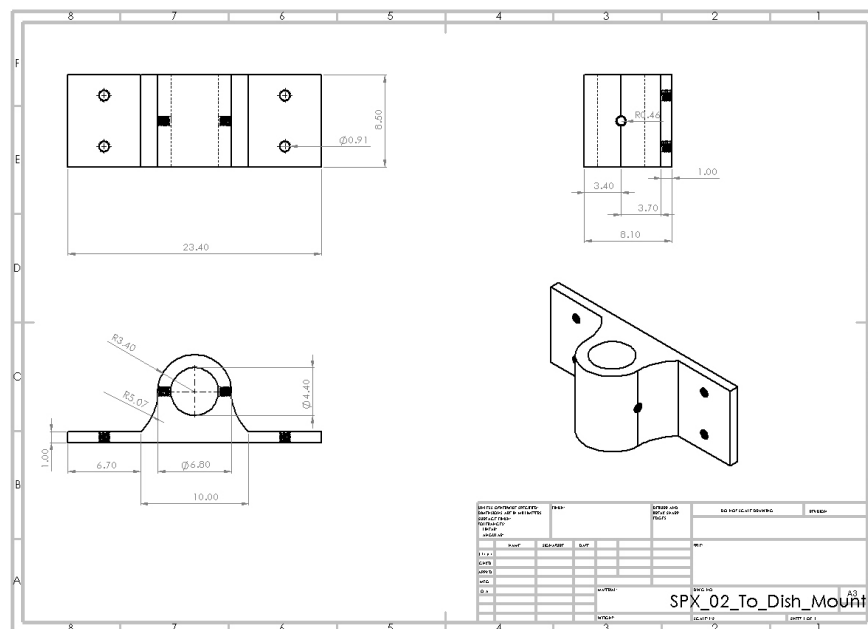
Mounting Piece from Rotor to Antenna (cm)
